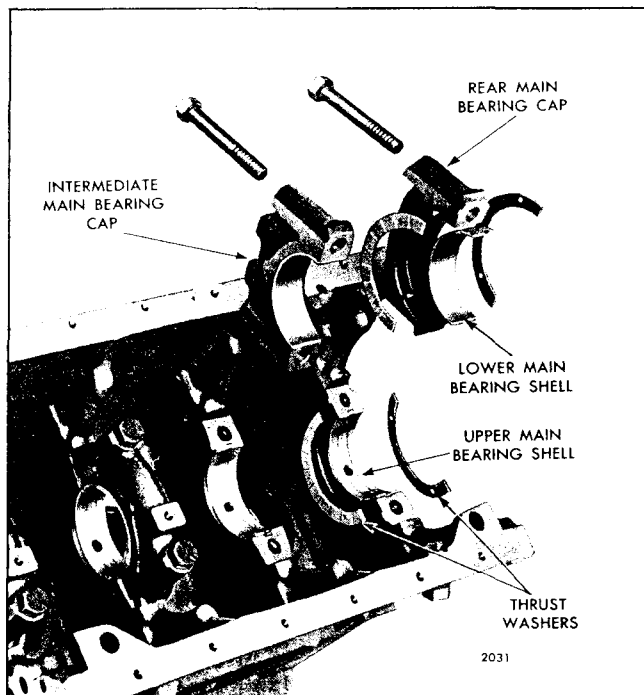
Main Bearing Shells, Bearing Caps and Crankshaft Thrust Washers -- In-Line Engines
